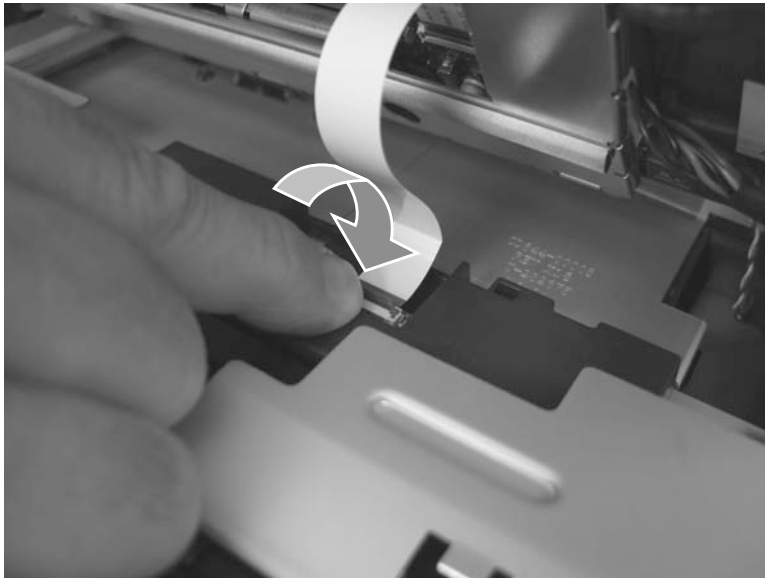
Reinstall the control-panel assembly (3 of 13)
